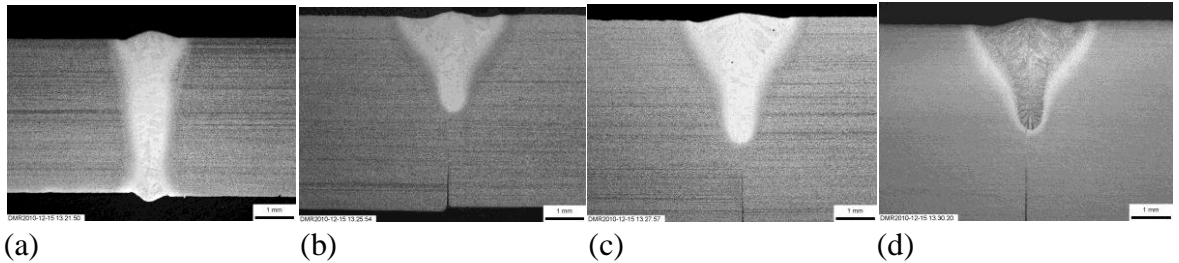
Butt welds produced using 4 (a), 5 (b), 6 (c) and 7mm (d) thickness Ti-6Al-4V with the YLS-5000 Yb-fibre laser, a welding speed of 66.7mm/s, a focal plane position of -2.0mm, and a focusing lens of 160mm (a) and 500mm (b,c,d).
